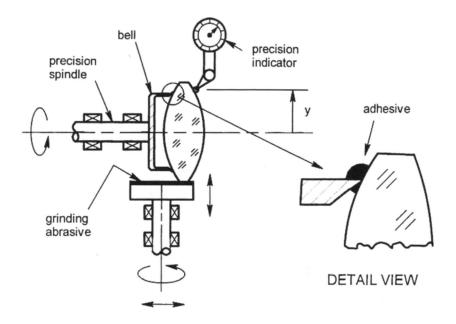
Schematic setup for centering and edging a lens element on a precision spindle. The detail view shows one means for securing the lens on the bell of the machine.
